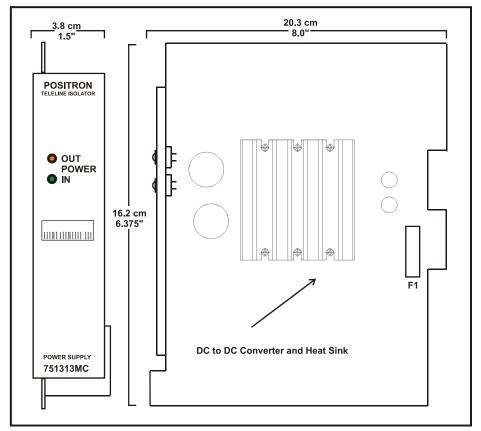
Plug-in Power Supply Card (751313MC) Component Layout
